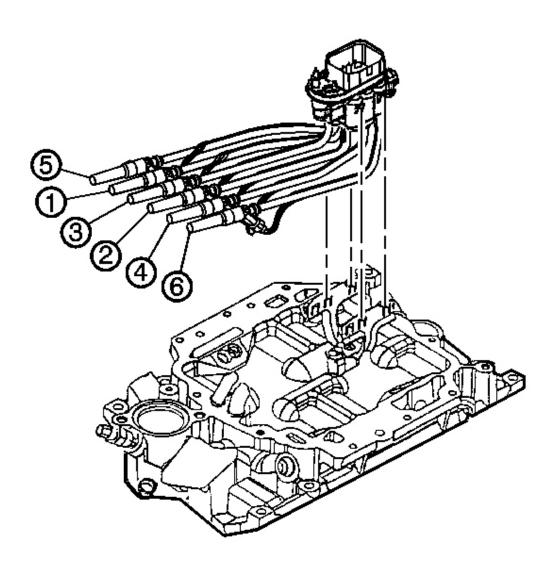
Injectors At Lower Intake Manifold Bores Courtesy of GENERAL MOTORS CORP.
